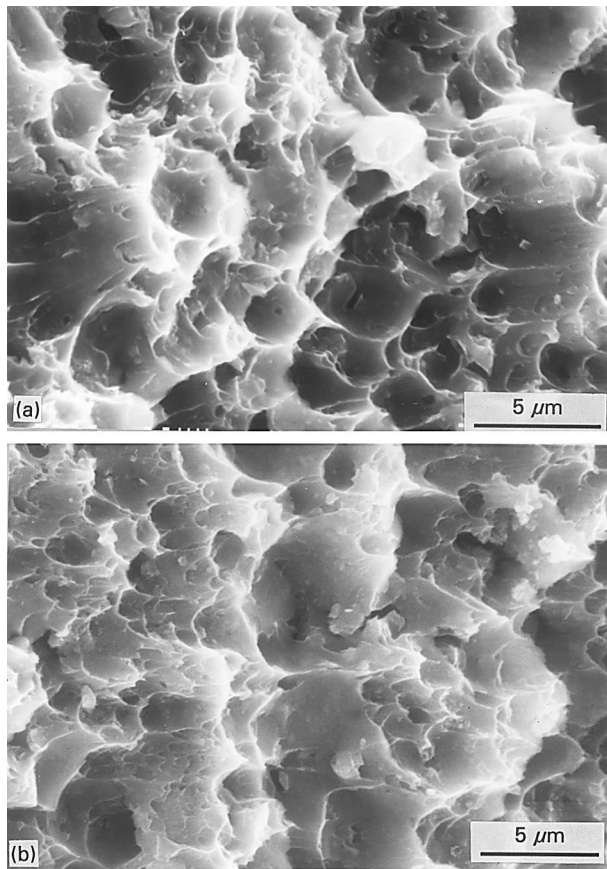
(a) SEM fractographs (45° tilt) showing a typical shear fracture surface and (b) the shear-lip area of a normal “cup-cone” fracture surface (HT specimen) in plain tension (tensile axis horizontal).
